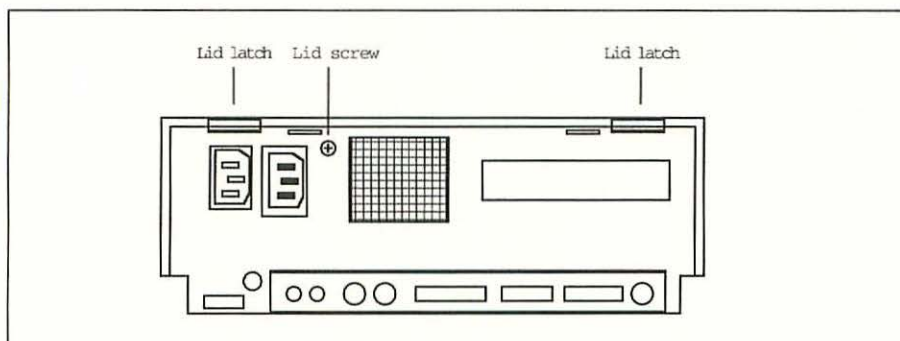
The lid or cabinet top of the Macintosh IIx CPU is fastened by a single #1 Phillips-head screw.
